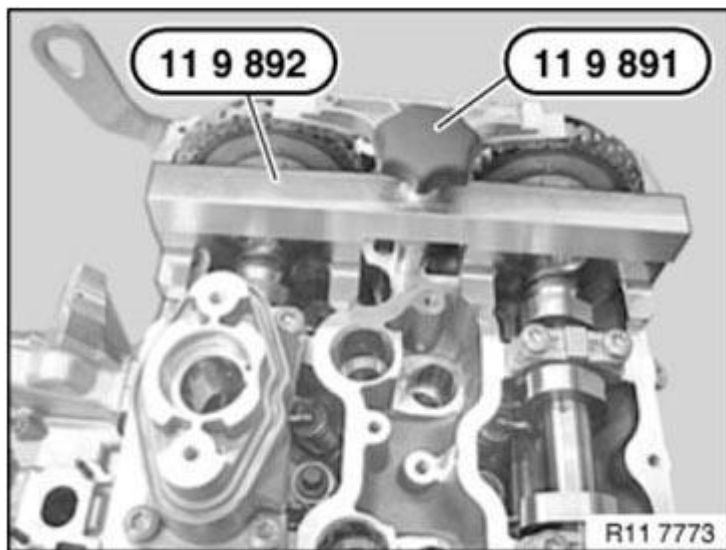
Positioning Special Tool 11 9 892 On Special Tool 11 9 893
